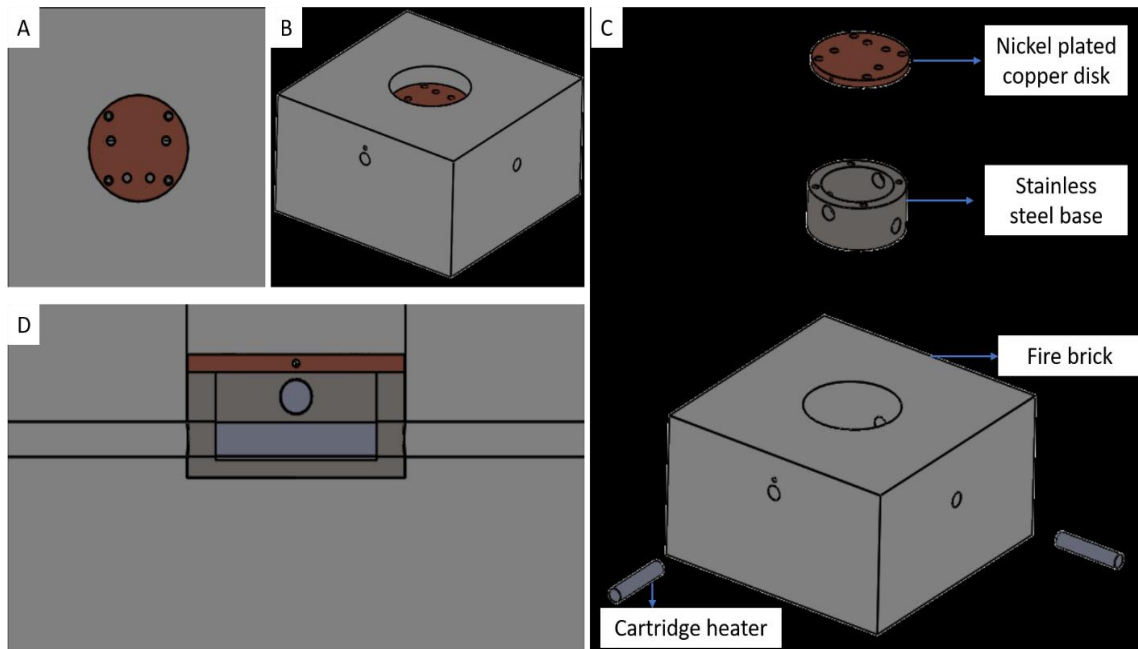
(a) Front view of the nickel-plated copper disk with diameter 1.688 inch containing 4 thru threaded holes to attach the sample and 4 thru holes to fasten to the steel base. (b) Isometric view of the heater setup encapsulated by firebrick. (c) Exploded view showing cartridge heater, fire brick, steel base and nickel-plated copper disk. (d) Side view of the heater setup showing the press fitted cartridge heater, fire brick, steel base series stainless steel sheaths to precise dimensions and tolerances to ensure maximum heat
